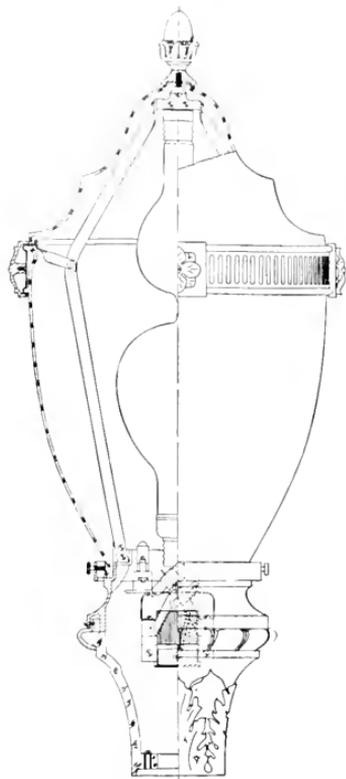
Part Sectional Drawing of the Duodlux Lighting Unit Used in the Lighting Installation at Saratoga, N. Y.
